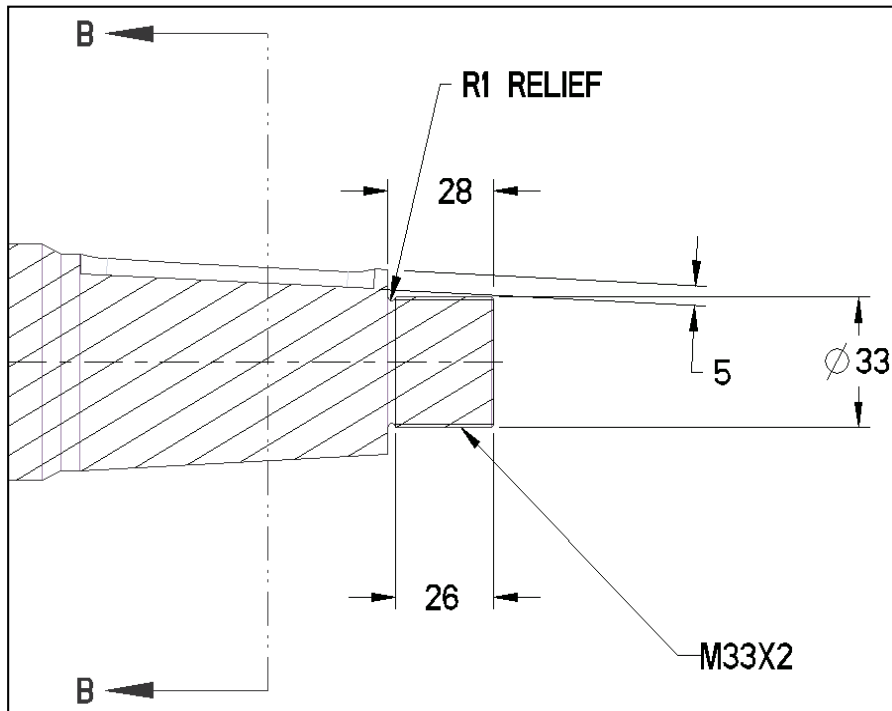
Coupling Shaft Drawing, Sheet Two, SECTION A-A Right Side
